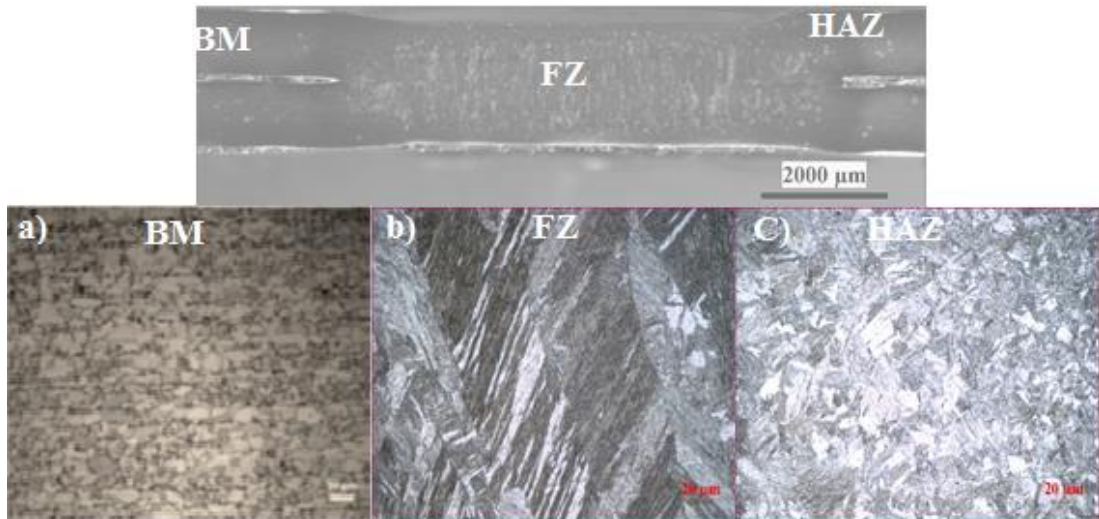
The weld zone profile and its microstructures of DP600 weldment joined with 4.5 Bar electrode force with 4kA welding current. d) DP600 base metal (BM), e) DP600 Heat Affect Zone (HAZ), f) DP600 weld nugget (FZ).
